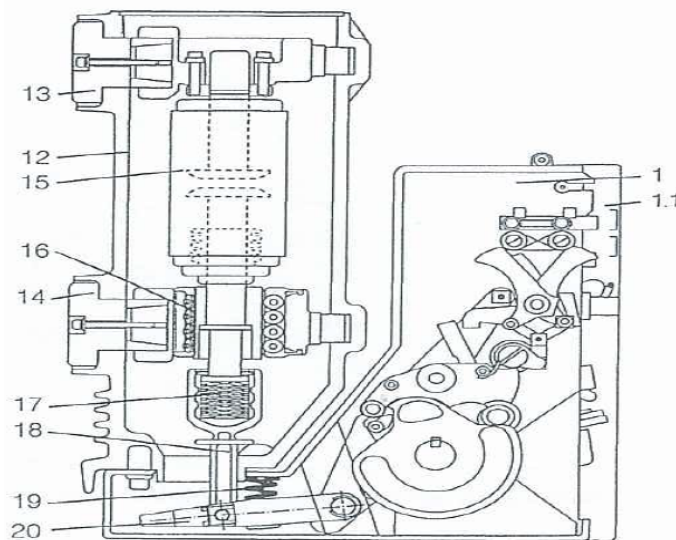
Medium-voltage vacuum circuit-breaker, 1, breaker mechanism housing; 1.1, front panel, removable; 12 insulating material pole tube; 13, upper breaker terminal; 14, lower breaker terminal; 15, vacuum interrupter; 16, roller contact; 17, contact pressure spring; 18, insulated coupling rod; 19, opening spring; 20, shift lever pair [2]
